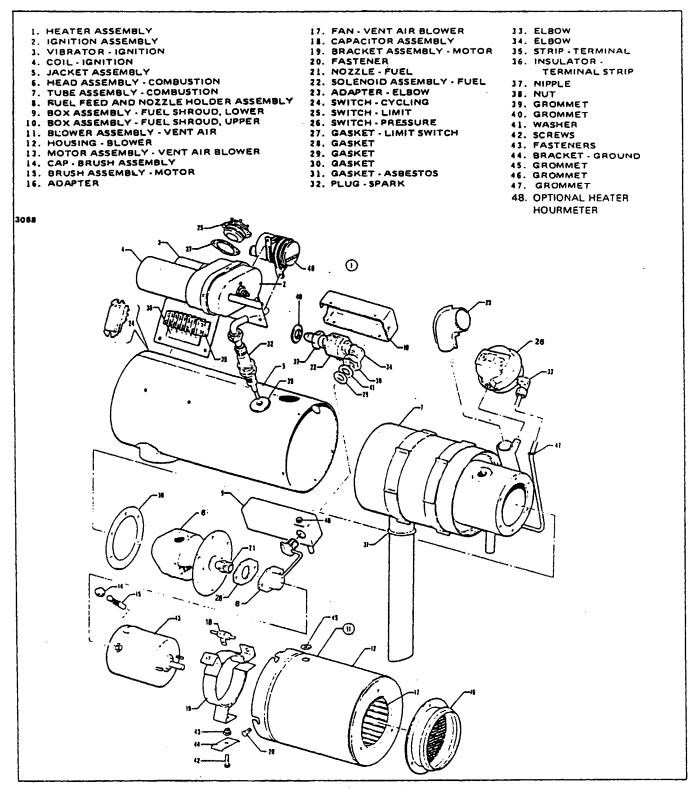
Exploded View of Heater Assembly (45,000 BTU)
